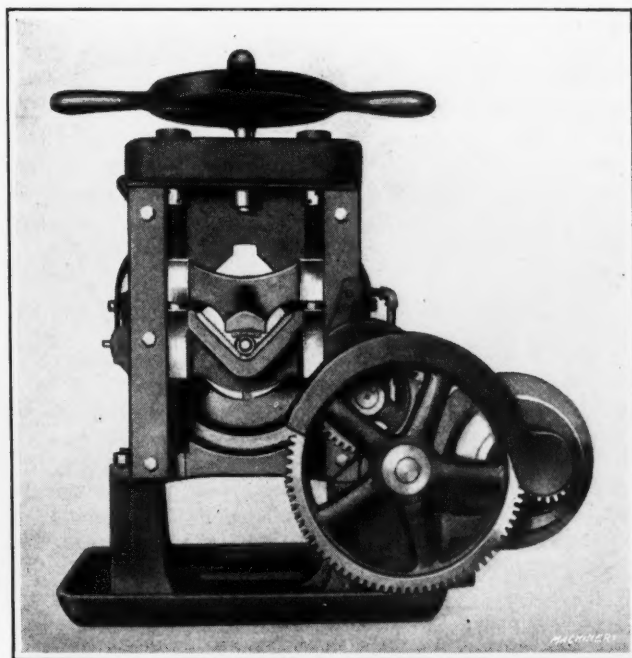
Pipe Threading Machine made by the Curtis & Curtis Co., showing Vise Jaws closed on Small Pipe
